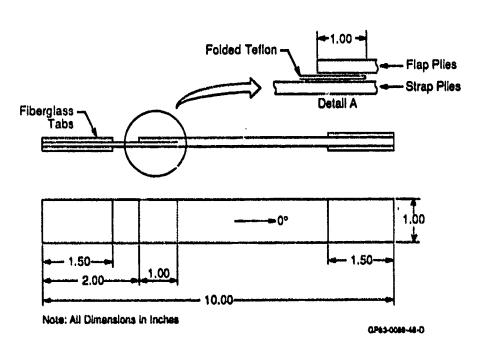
Cracked Lap Shear (Mixed Mode) Fracture Toughness Specimen
